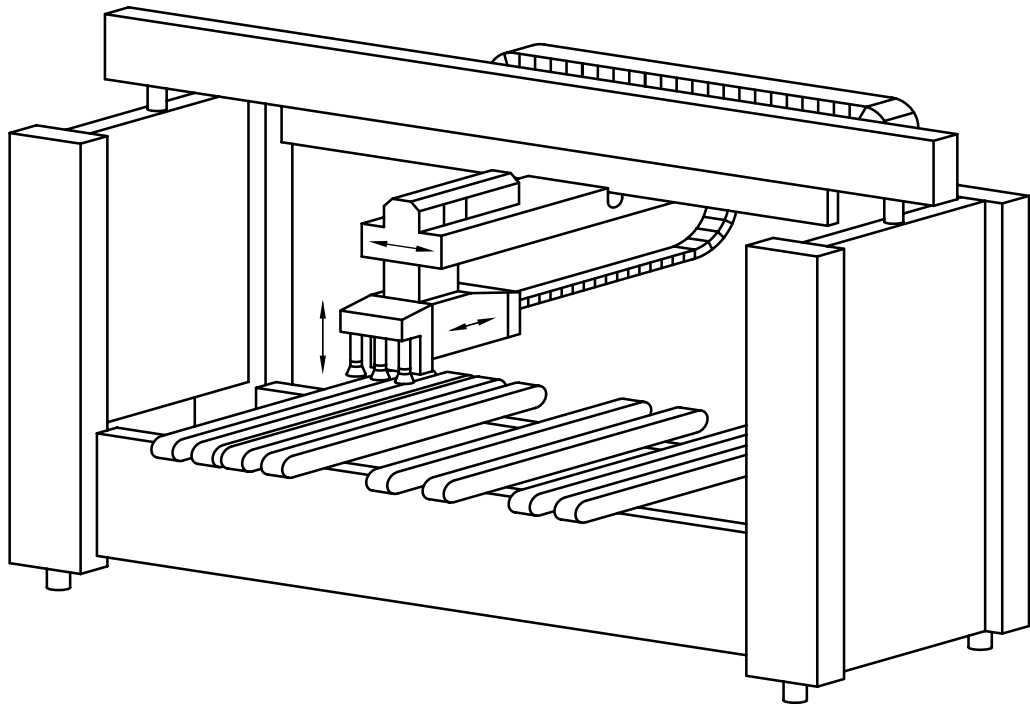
Example of portal frame machine with fixed portal, feeding belts, moving machining head
